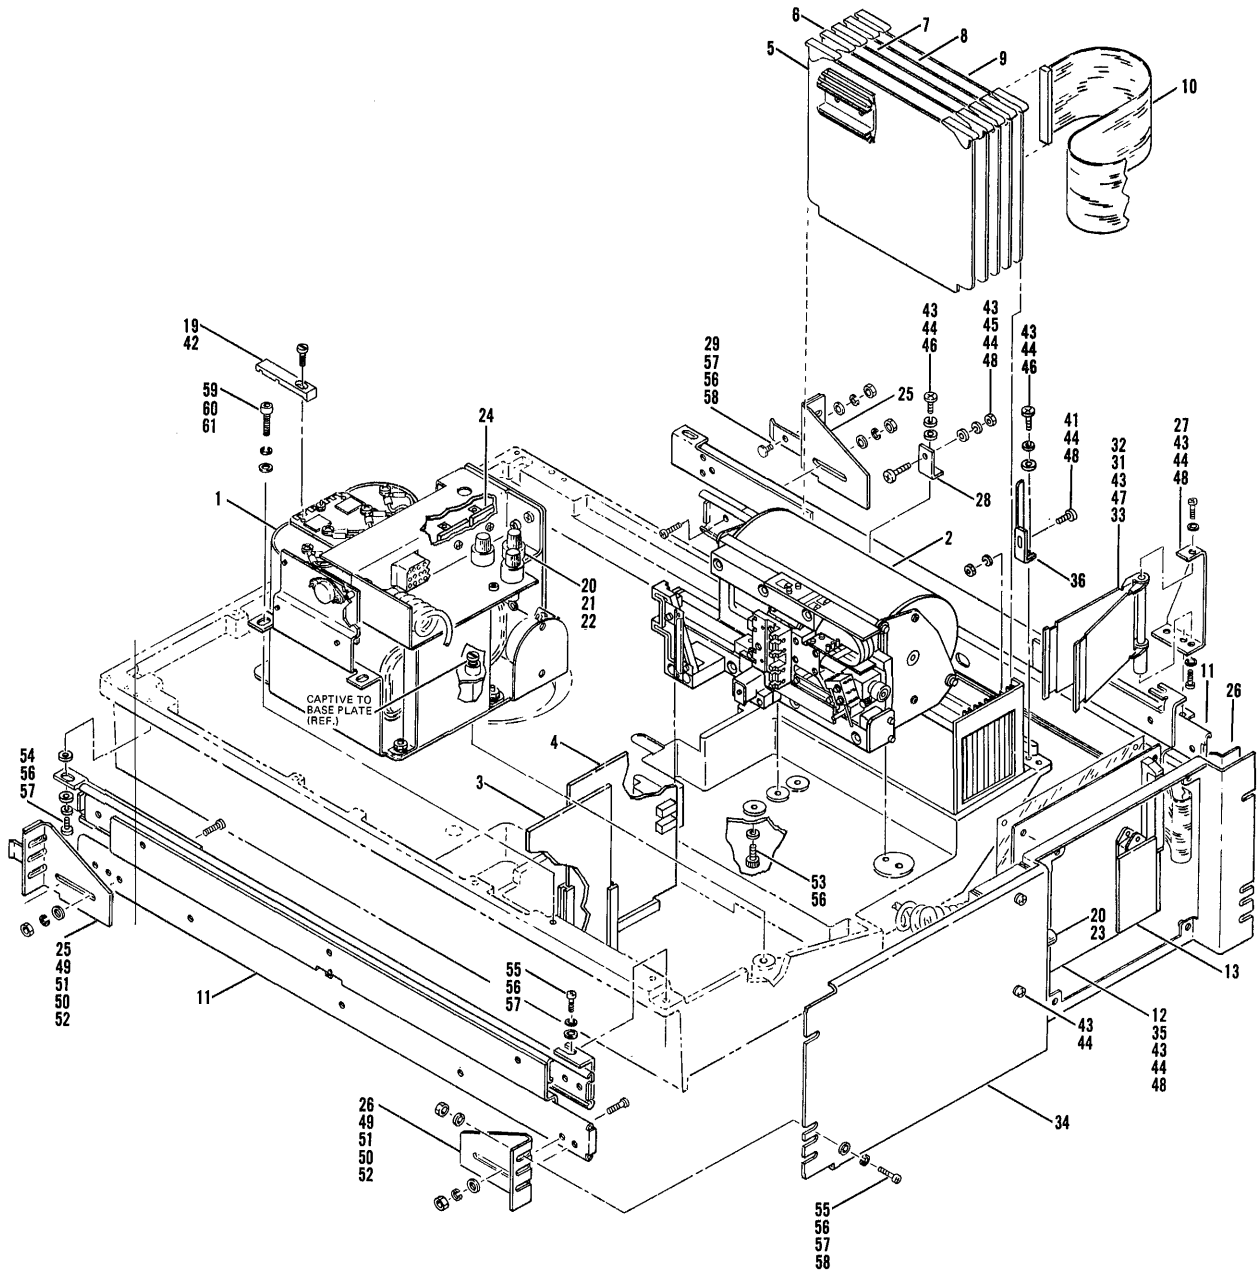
100/200 TPI Disc Drive Major Assemblies – Top View
